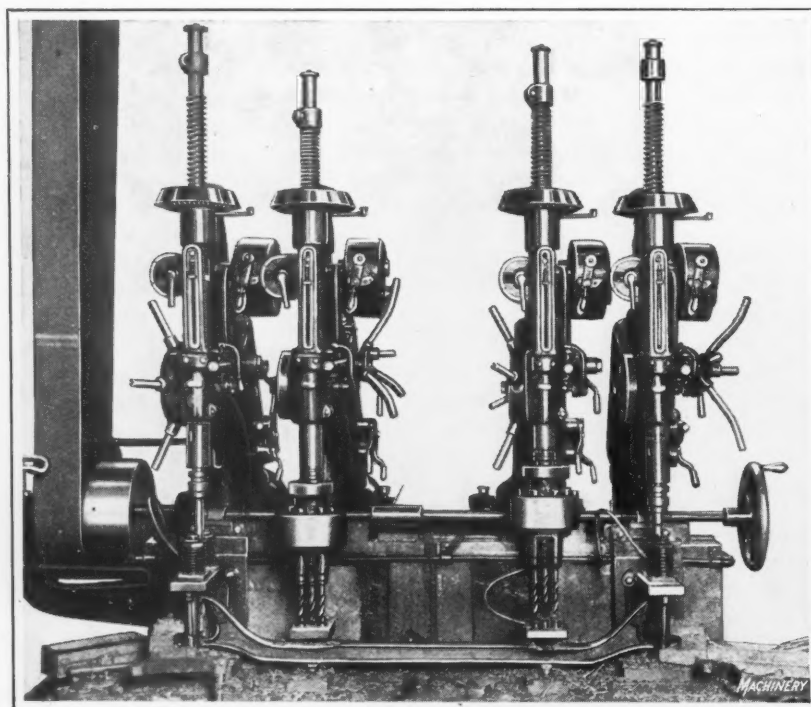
Four-spindle Gang Drilling Machine used in the Manufacture of an Automobile Axle
